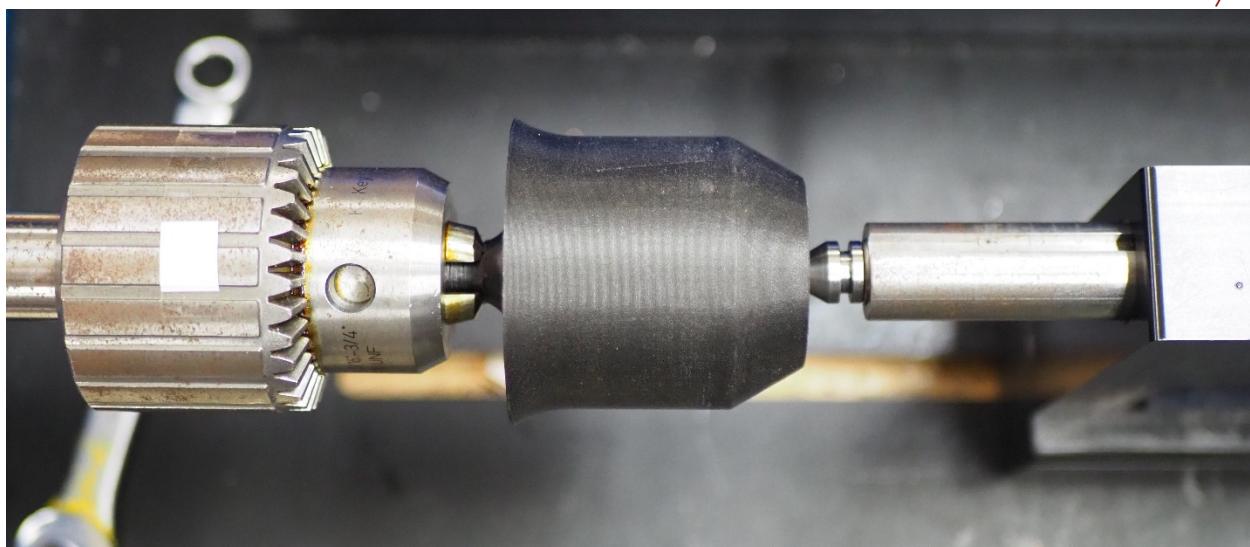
Winding jig tightened in chuck with dead center moved into jig.
